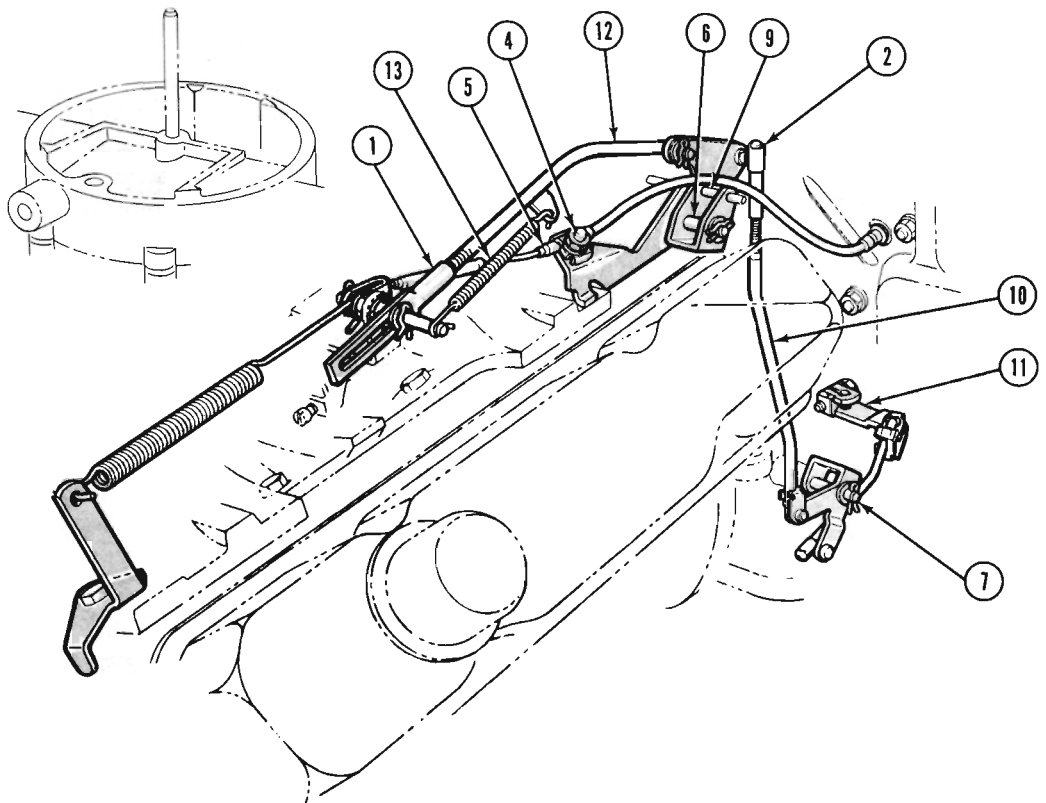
Throttle Linkage Adjustment (Barracuda with 383 Cu. In. Engine)
